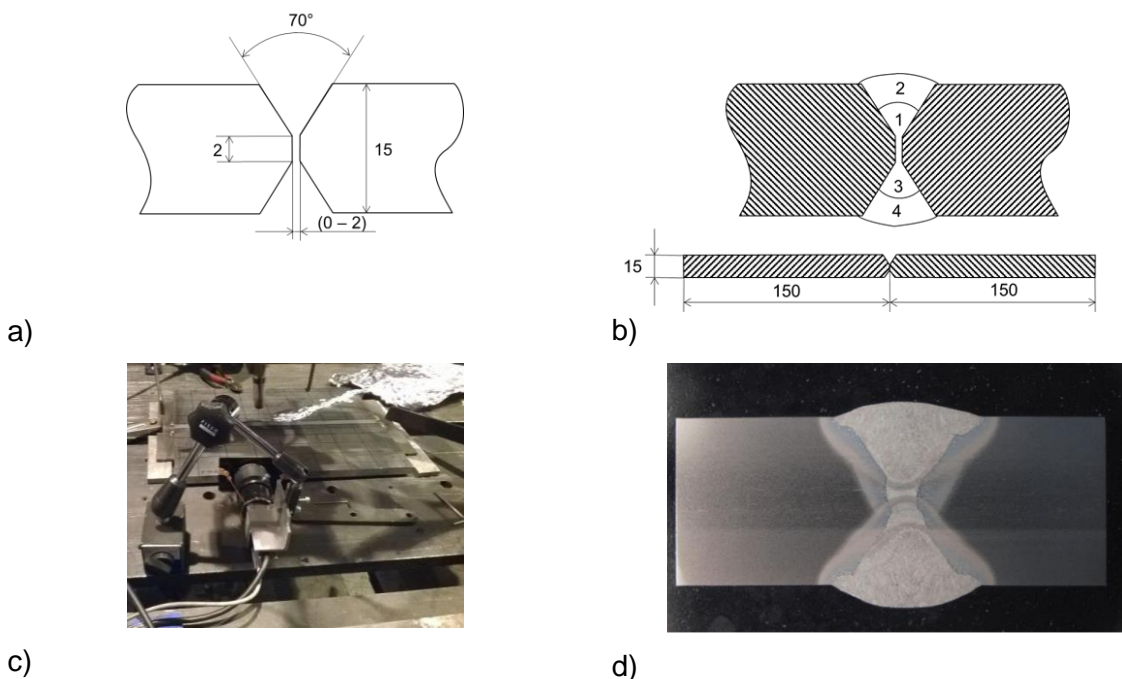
Laboratory MAG welding tests at LUT: a) groove geometry, b) welding sequence, c) welding arrangements with arc monitoring and d) weld macrograph.
